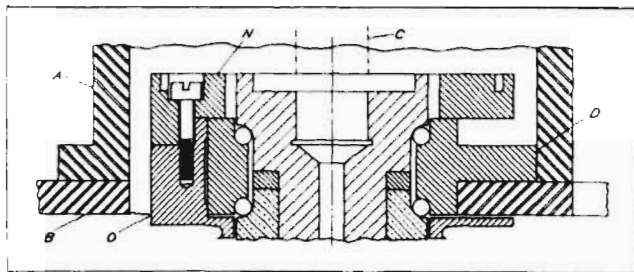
Enlarged view shows details of main bearing *D* and parts *N* and *O*. Outer race of the bearing has a flange that is cut away at three points to permit passage and movement of part *O*.
